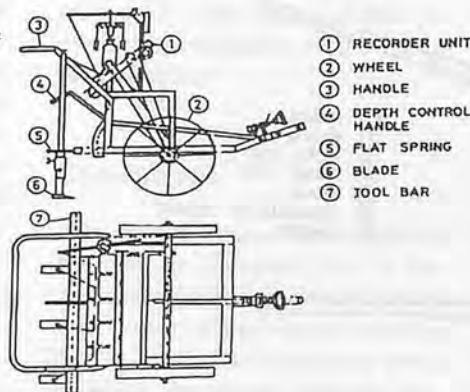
Mobile tool carrier unit with instrumentation (CIAE design).
